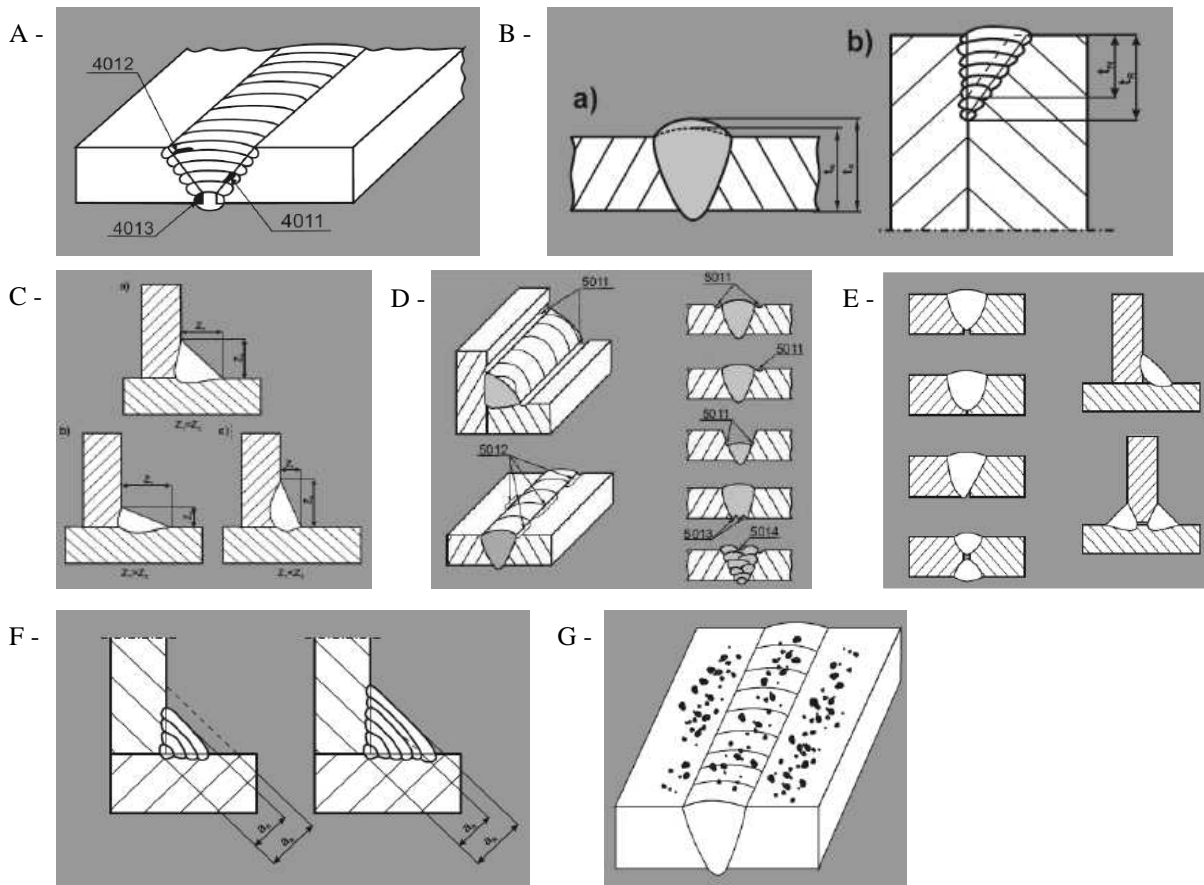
Scheme of welding incompatibilities in researches company: a – incomplete fusions, b – excessive bulge of the joint, c – wrong geometry of the made weld, d – undercuts, e – lack of joint penetration, f – insufficient thickness of the joint, g – metal spattering.
